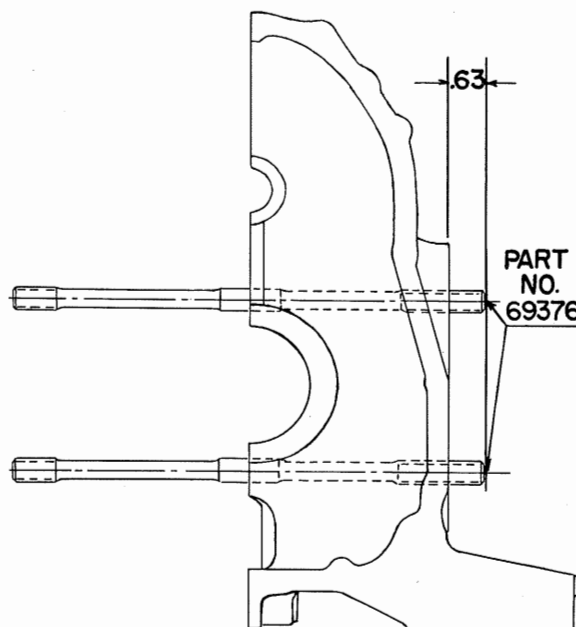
Dimension for Driving Necked Thru-Studs in O-320 Crankcase Half
